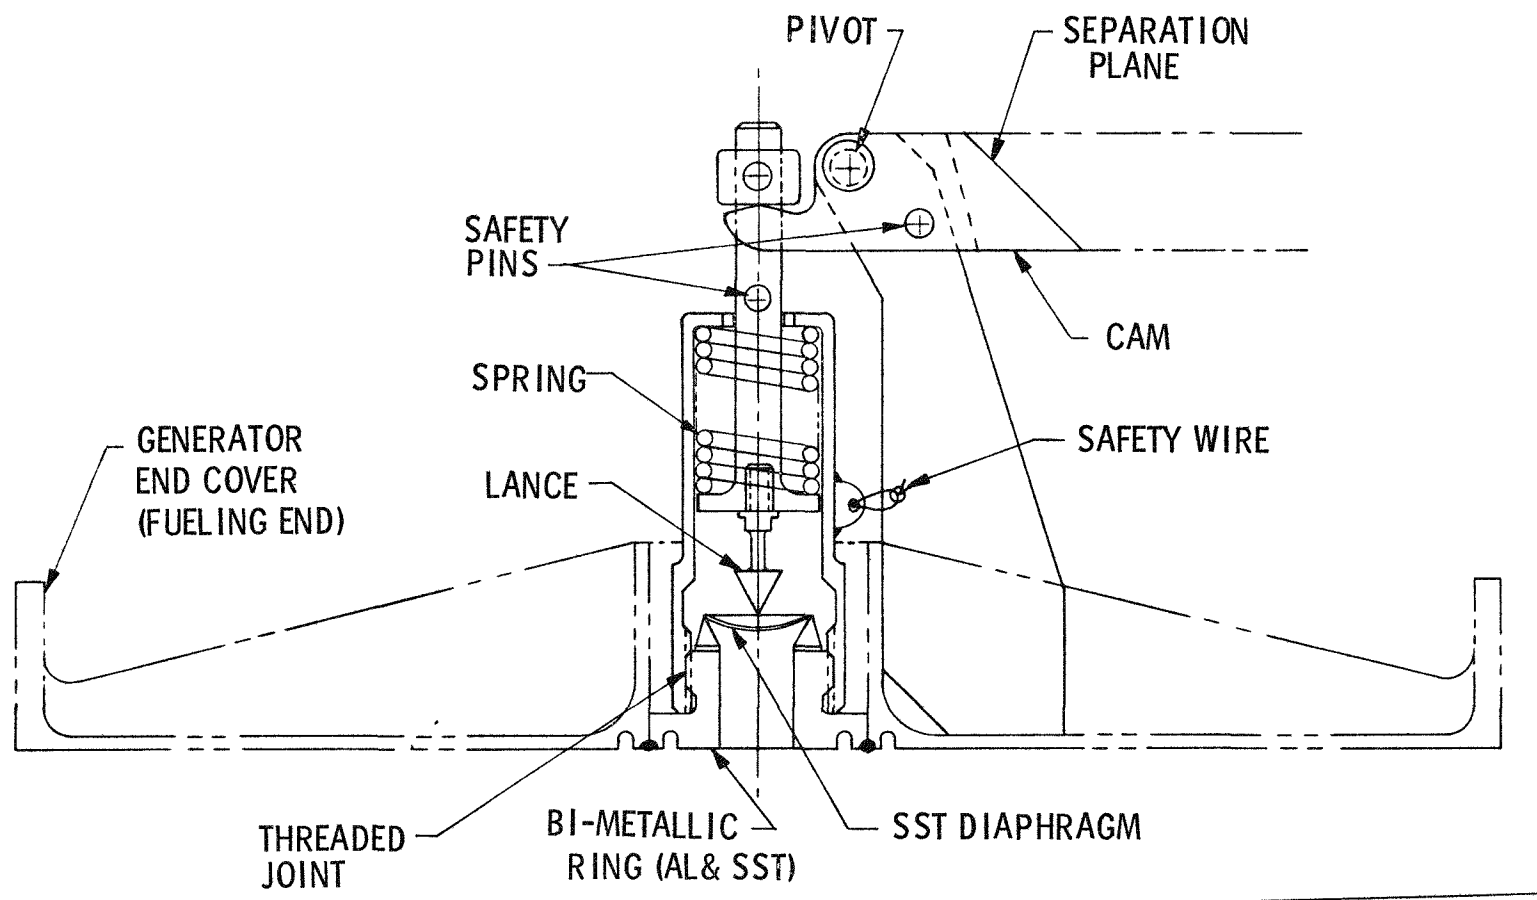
GVS Application of Bimetal Weld Transition Joint to SIG Galileo Design
